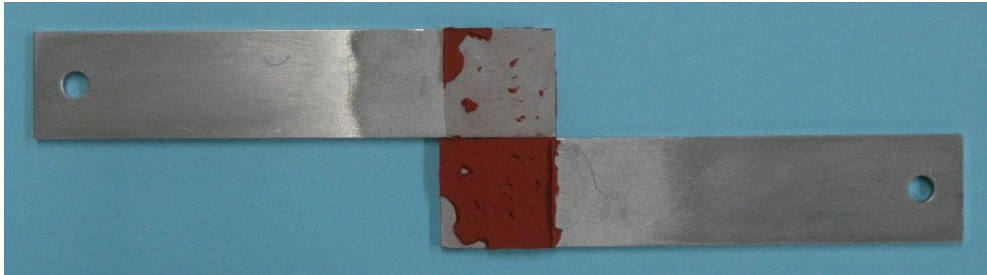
Representative fracture surface of SLJ specimen (tested at -65°C)
